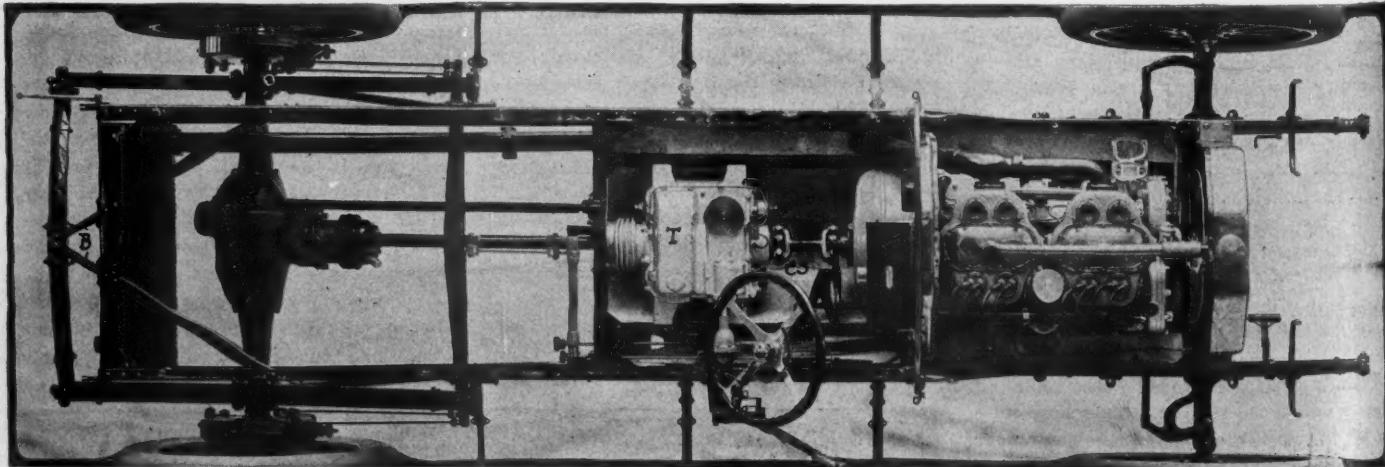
IN 1910 PEERLESS CHASSIS THE GEARBOX IS MOVED FORWARD 8 INCHES
